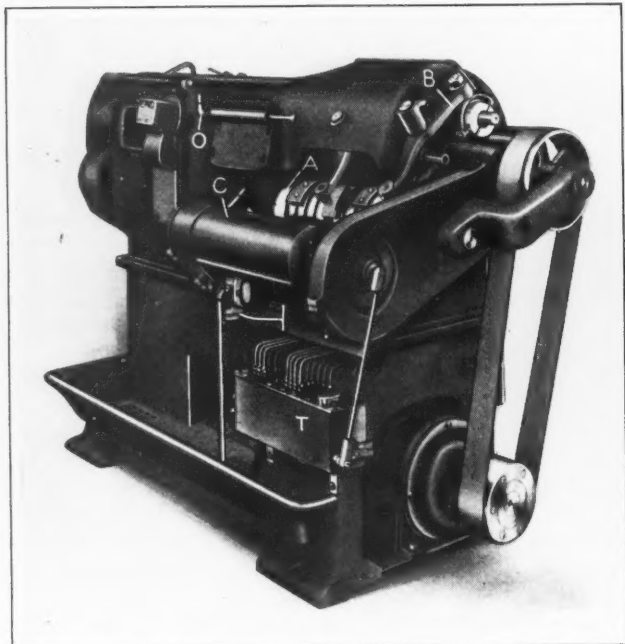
Driving Arrangement employed on the New Britain Chucking Machine
